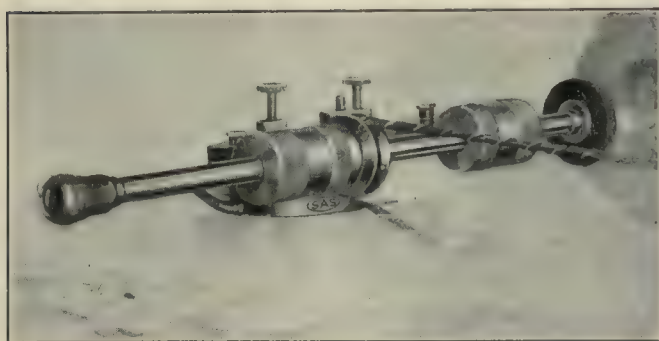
INTERNAL-GRINDING ATTACHMENT
